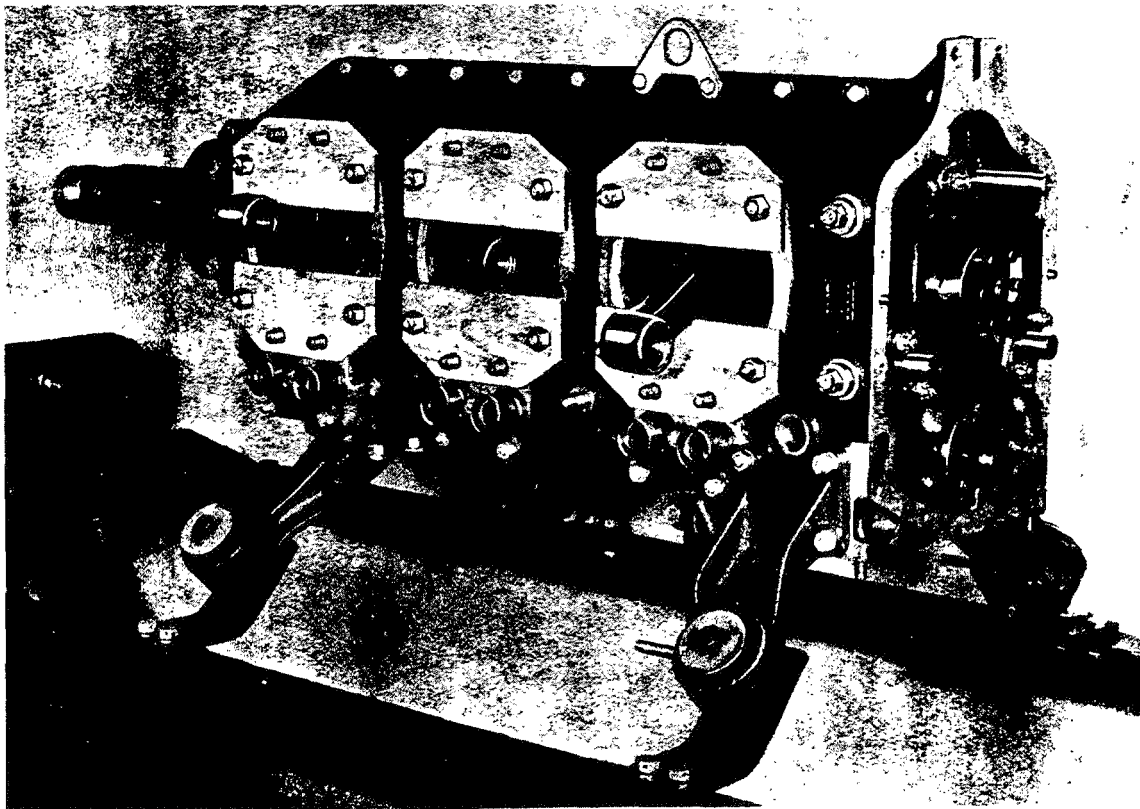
CRANKCASE WITH CYLINDER PAD PROTECTORS ATTACHED.
